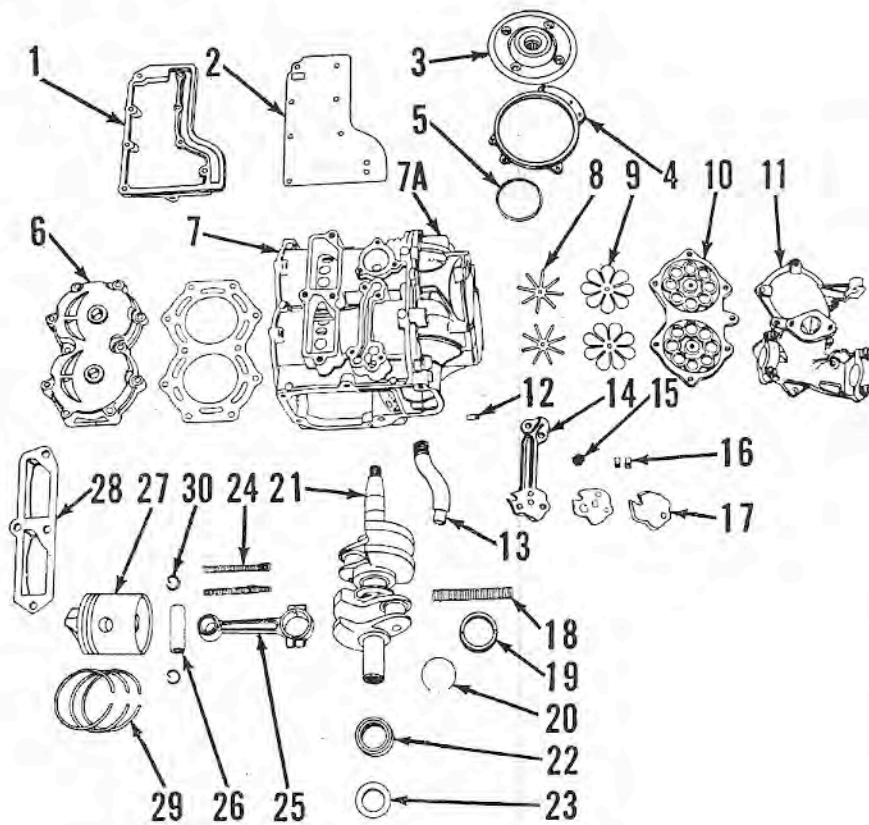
Exploded view of the power head of the general type used on all models. Shown is late model 12 horsepower.
